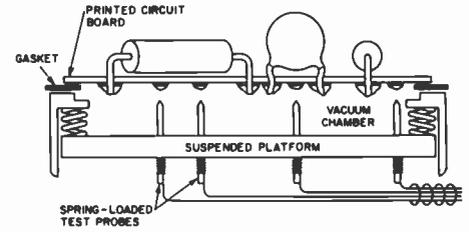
(above left) — Arrangement of component, test pads, and test probe. Fig. 6 (above right) — Circuit board and test system.
